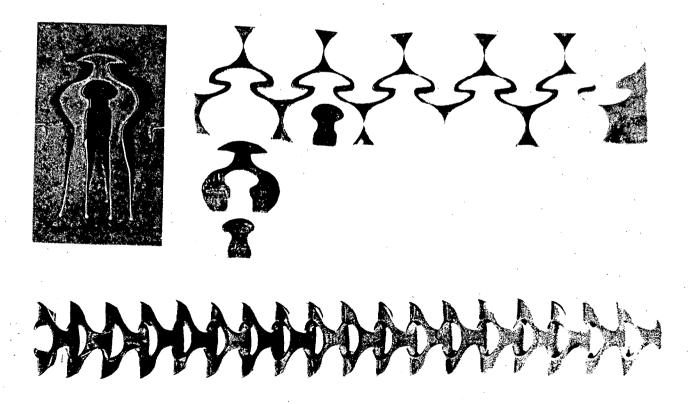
Double tool with guide notches to cut inner and outer shapes for the bracelet illustrated.
